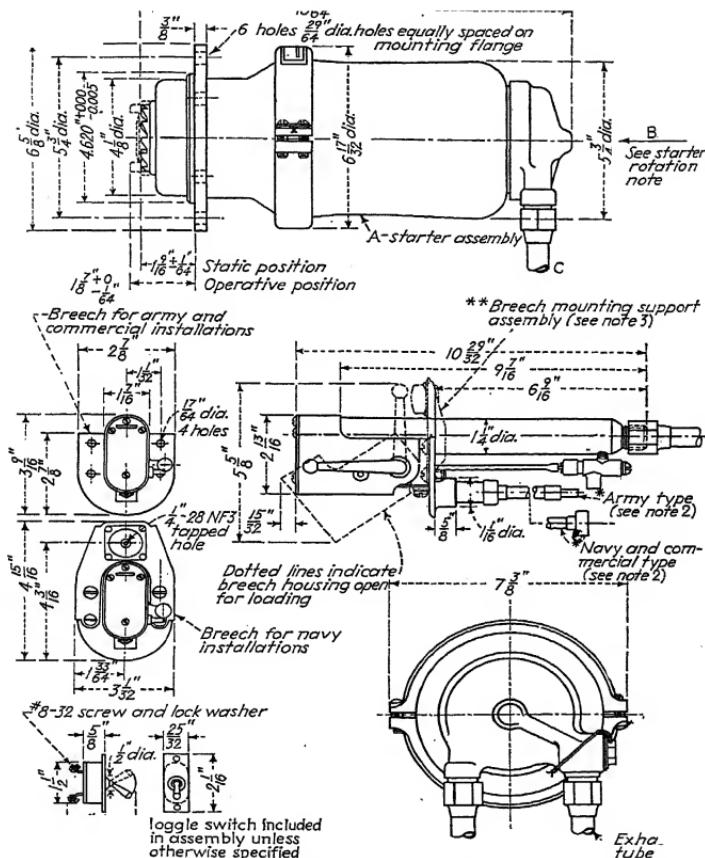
Details of Breeze cartridge-type starter showing installation dimensions.
